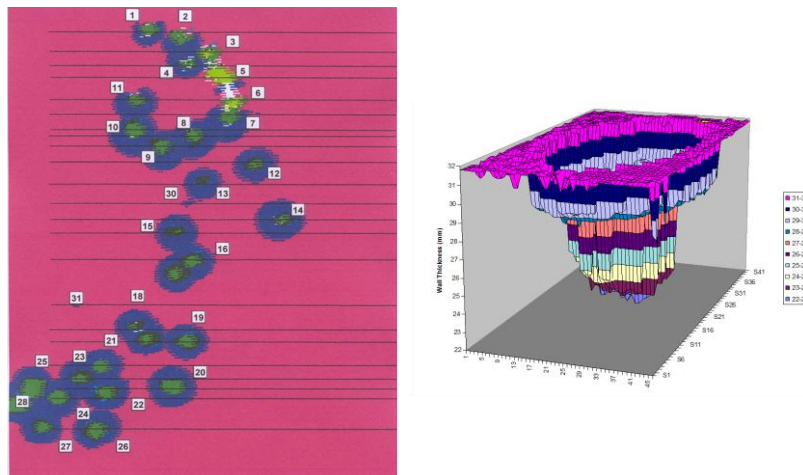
Anomalies identified during MFL inspection of carbon steel pipeline clad with 316L - Anomaly dimensions confirmed by external TOFD
